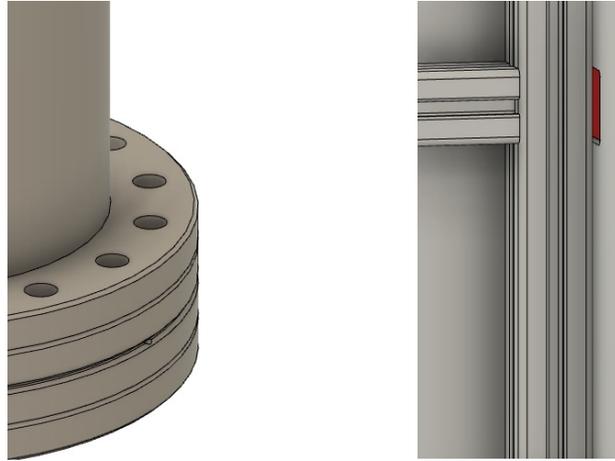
Flange (left) with holes for M8-screws and aluminium frame (right). CAD Courtesy of [48].
